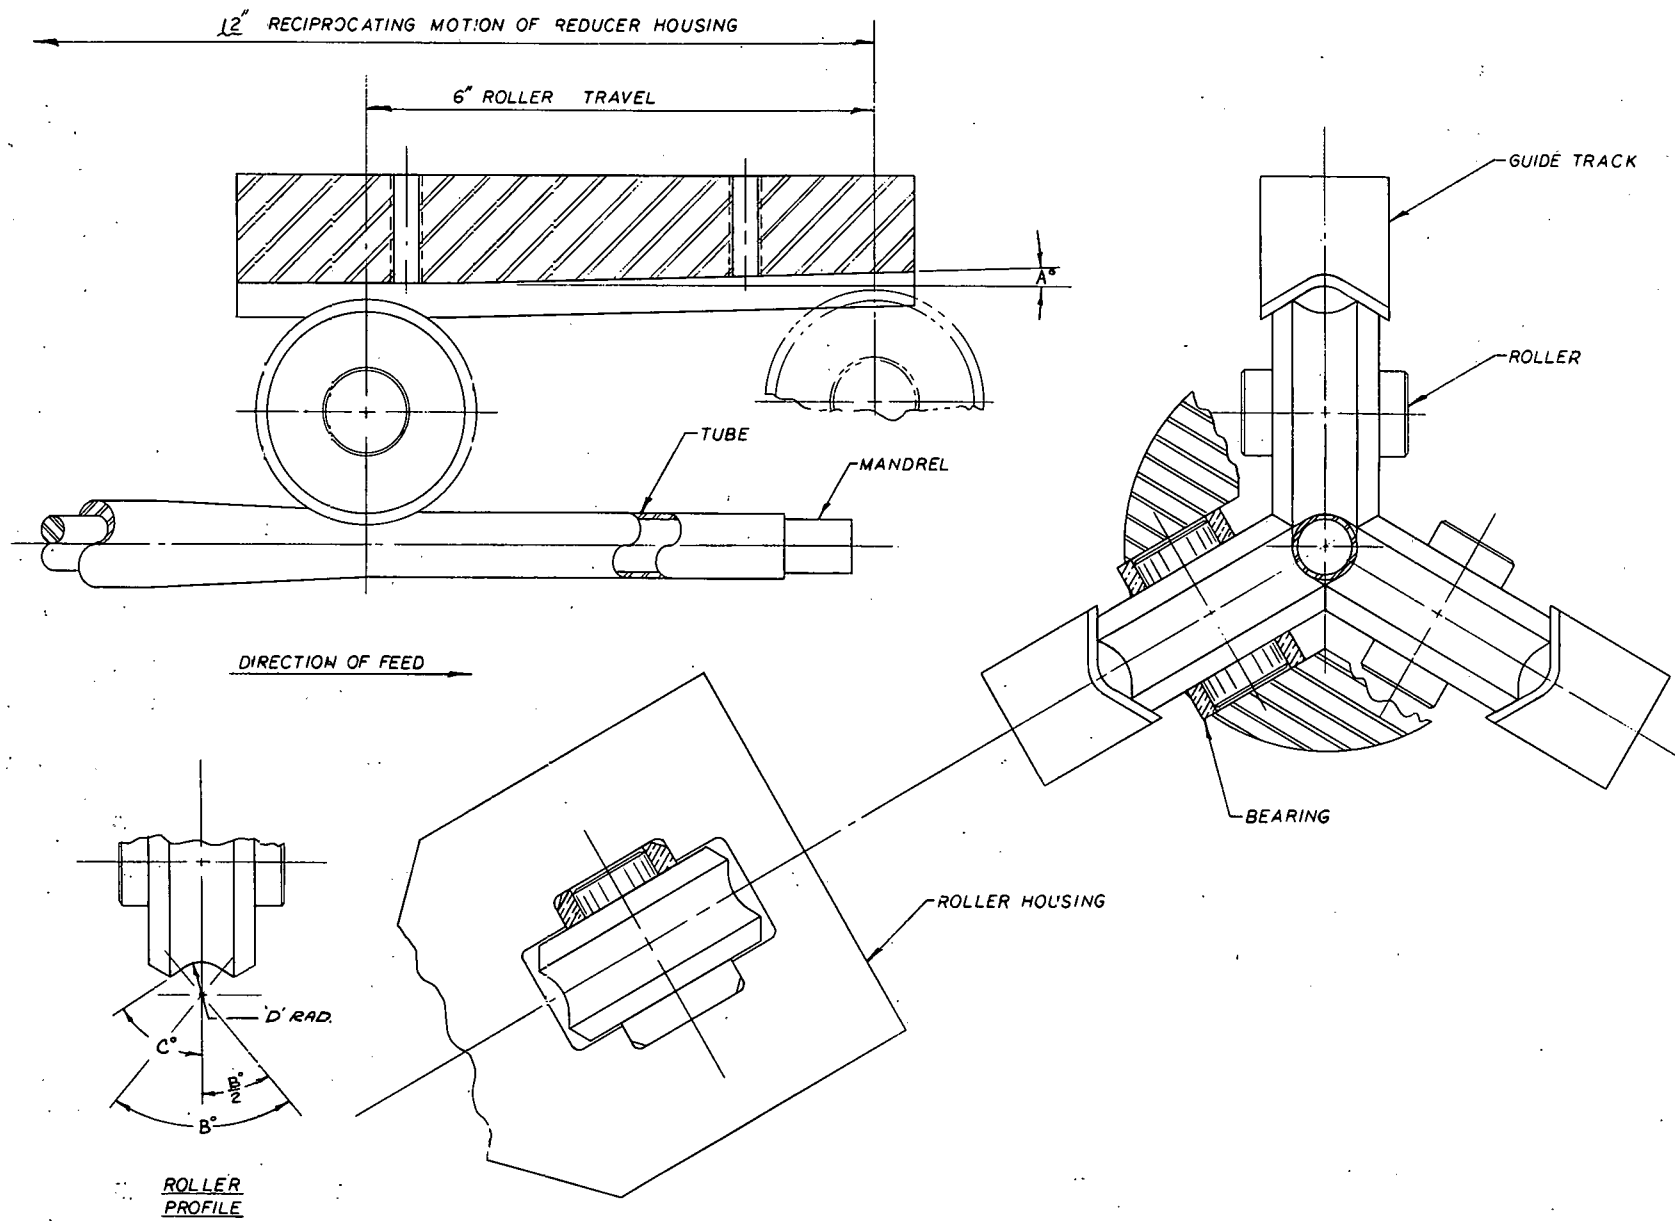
Roller Arrangement and Operational Details of the ANL Three-roll Tube-reducer
